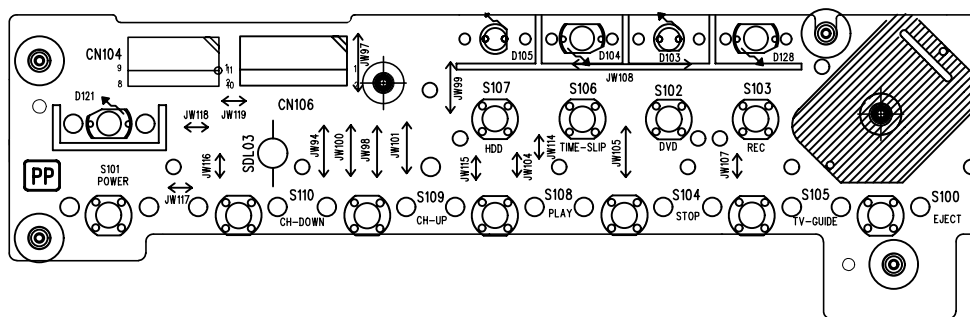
EU03B Front (L) PC Broad (Top side)
